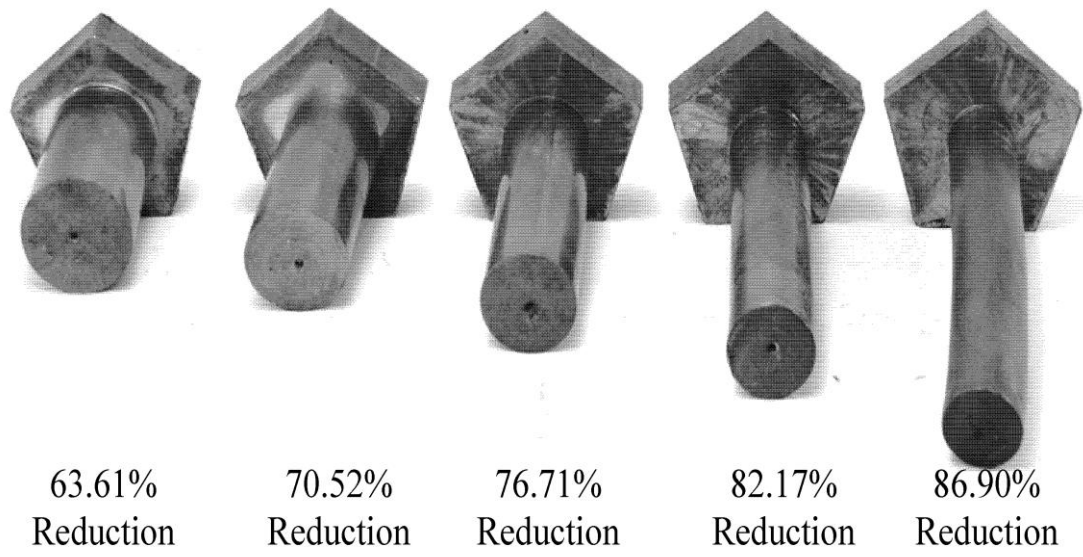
Extruded forward extrusion-forging pentagonal head shaped product
